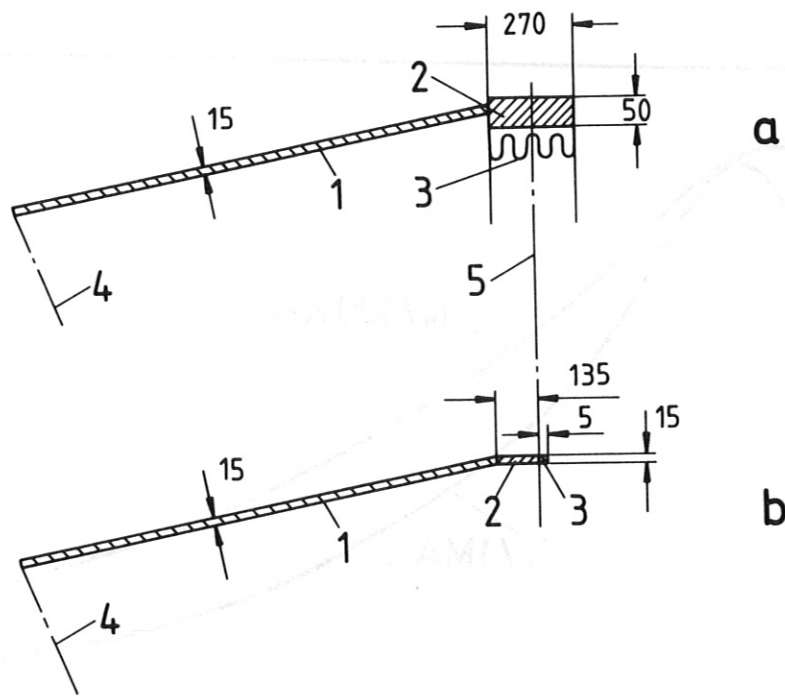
Cross-section of the wall of a vessel segment. a actual cross-section; b cross-section of the calculation model. 1 shell, 2 flange, 3 bellows, 4 octant connection, 5 bellows connection.
